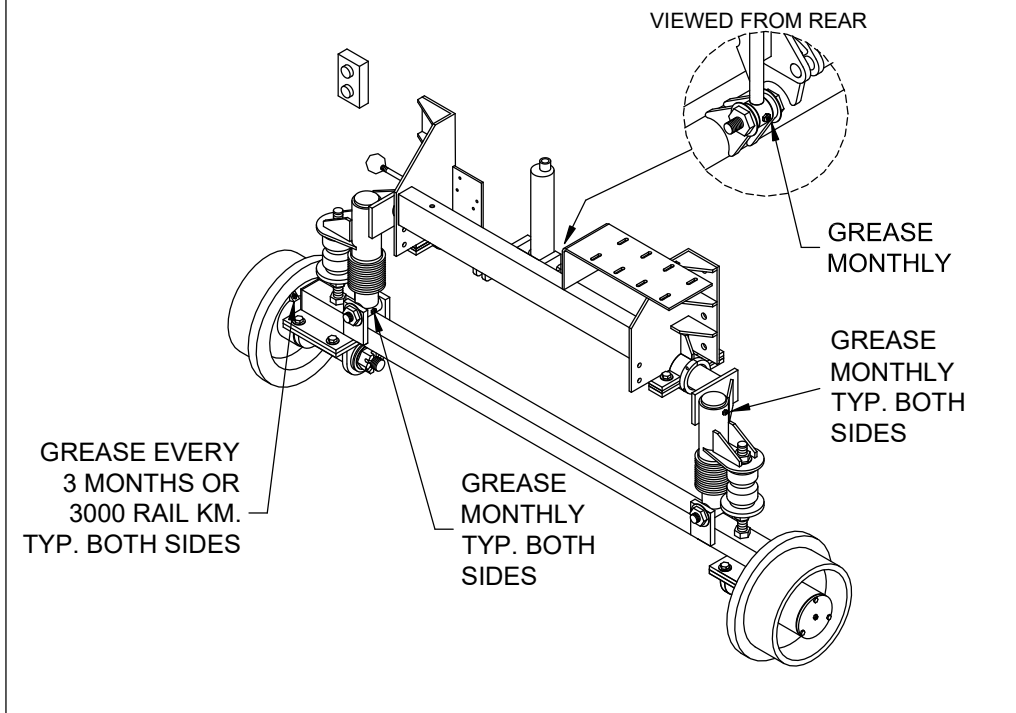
REAR RAILGEAR LUBRICATION POINTS
